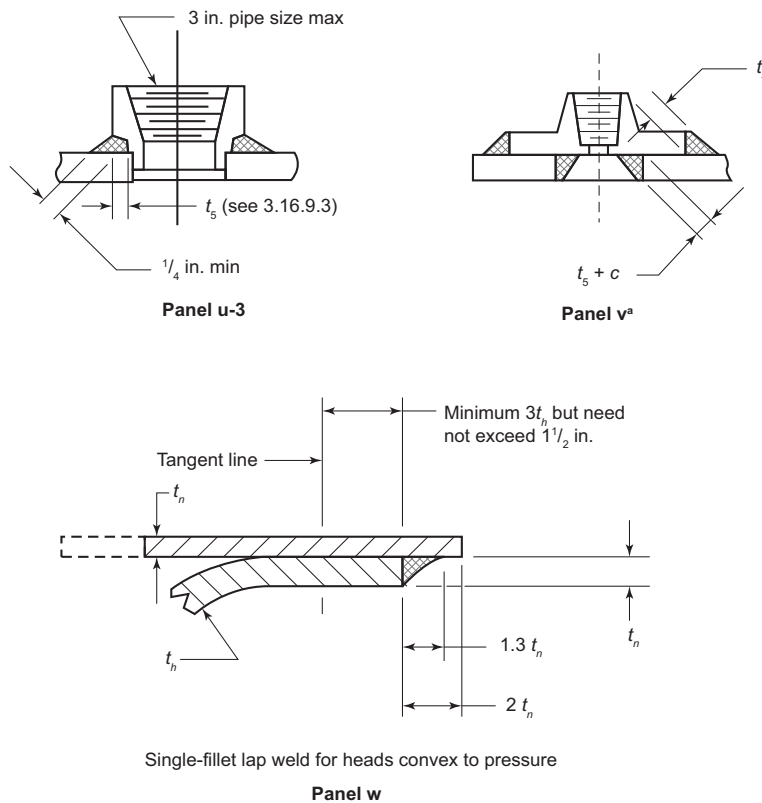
Part 3—Acceptable Types of Welded Nozzles and Other Connections
